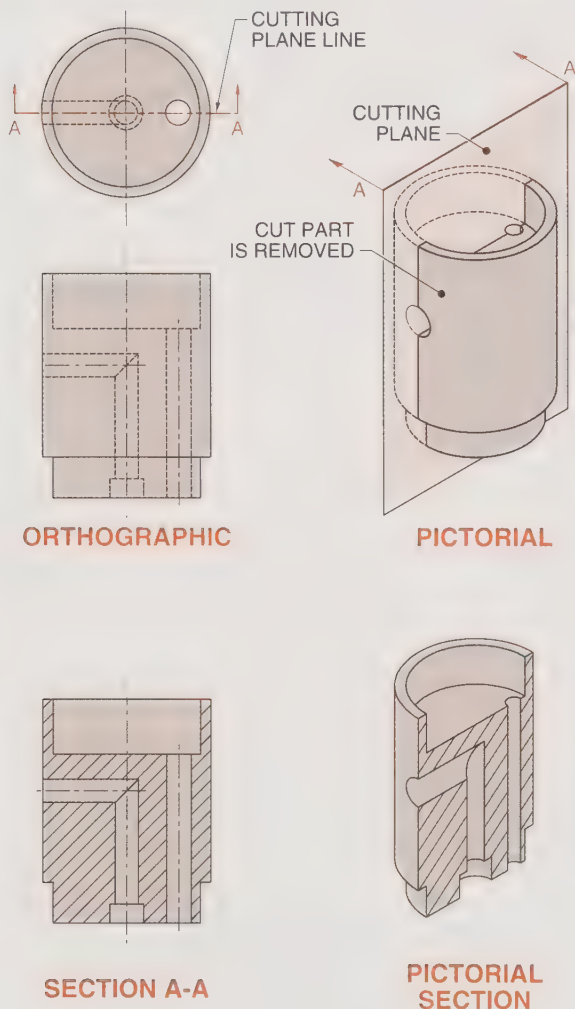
A sectional view is obtained by passing a cutting plane through the object.
